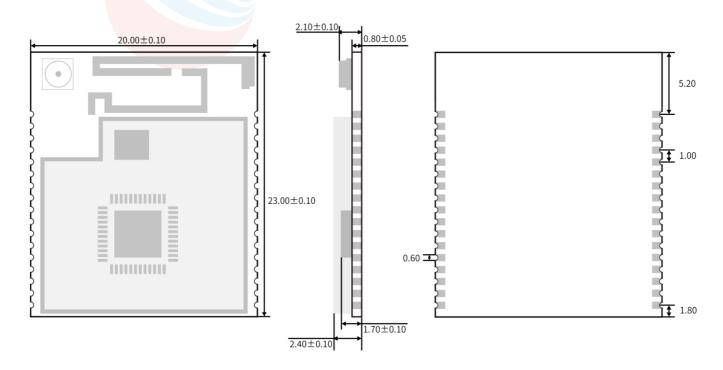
Recommended PCB Footprint of RF-WM-11AFB1 (mm)
